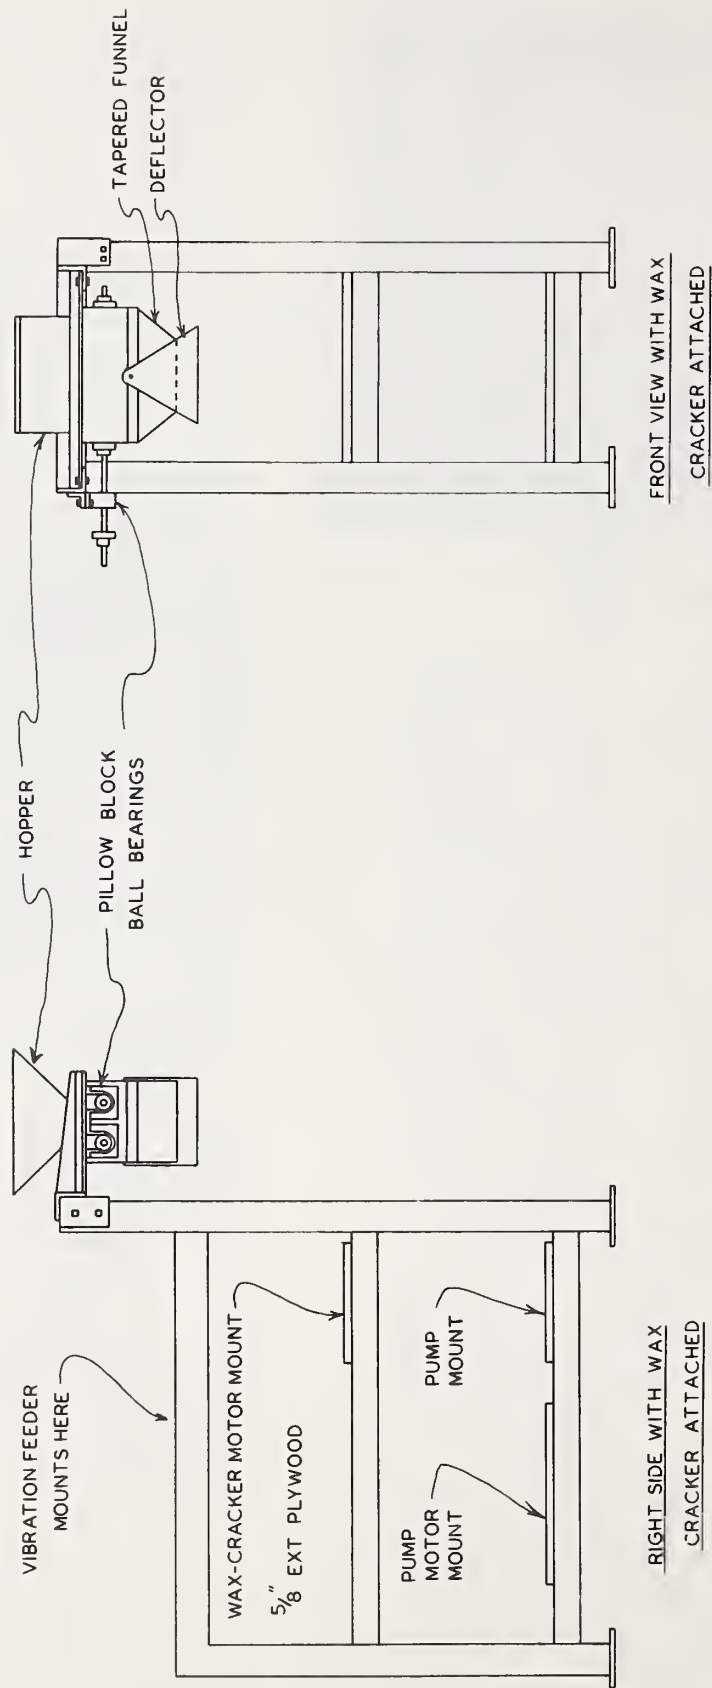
Schematic diagram of wax-cracking-unit assembly.
